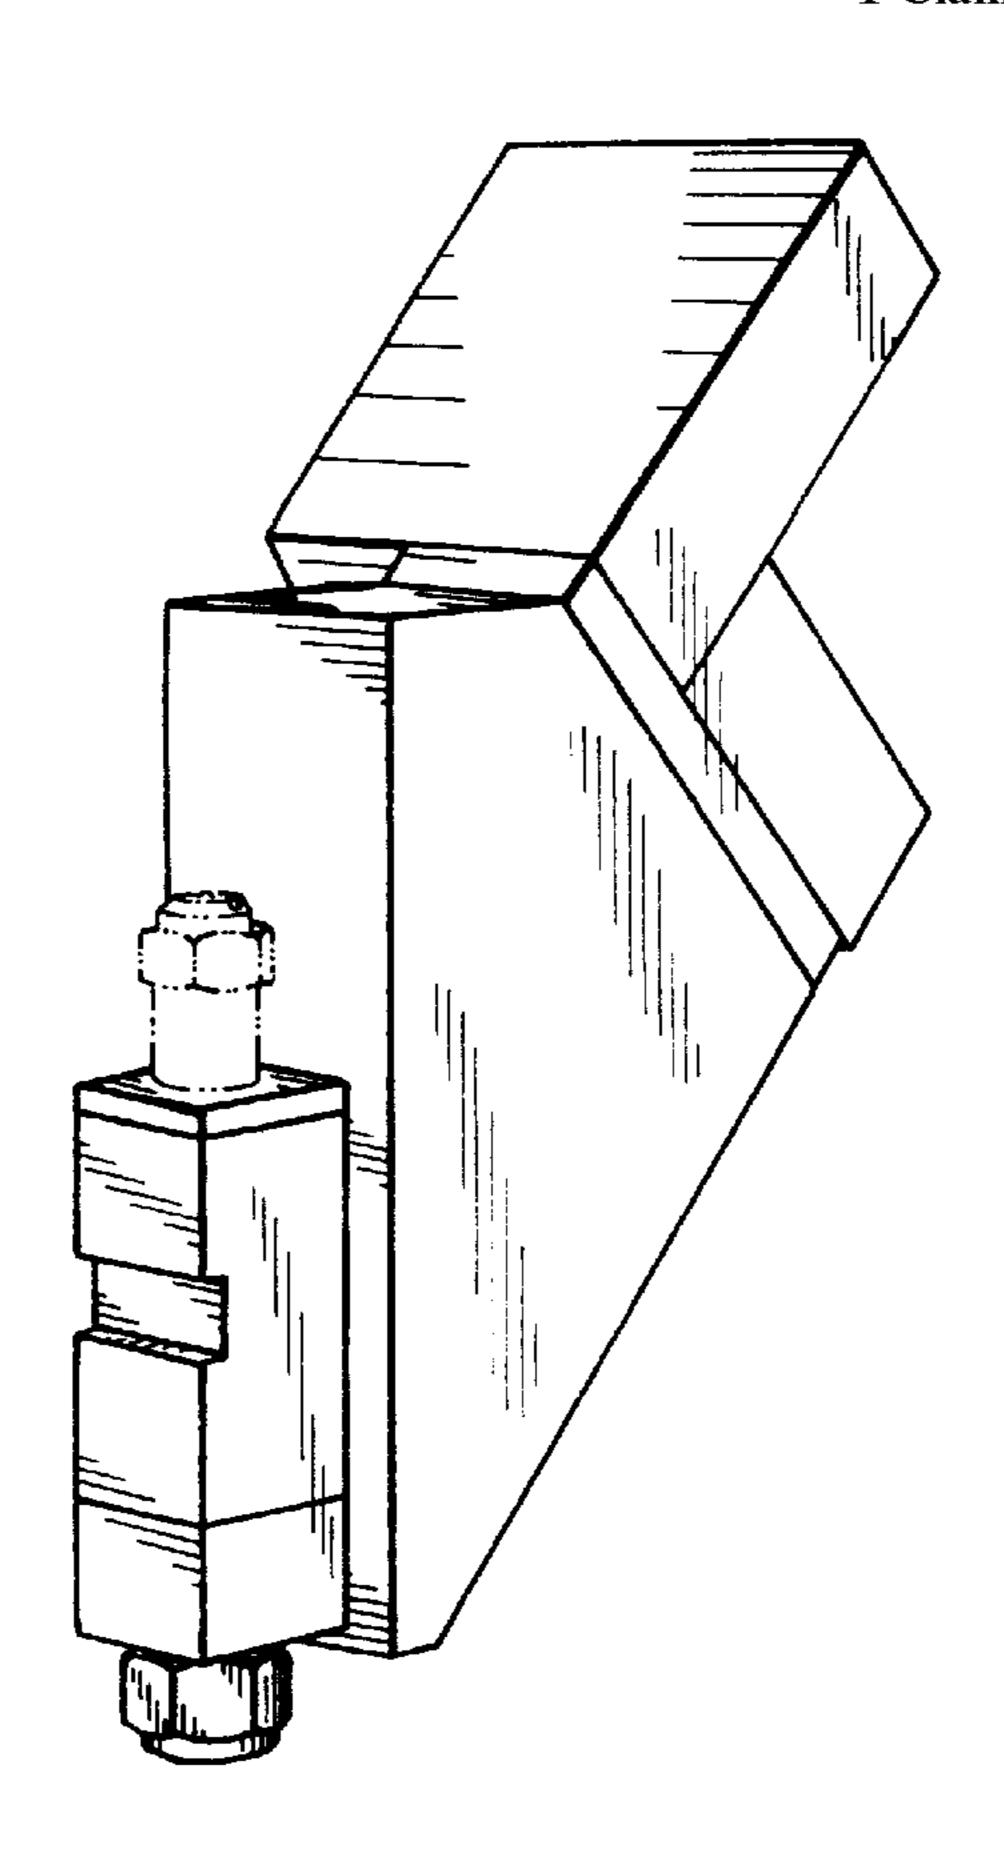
is a left side view taken of FIG. 9 with the right side view being a mirror image thereof;
